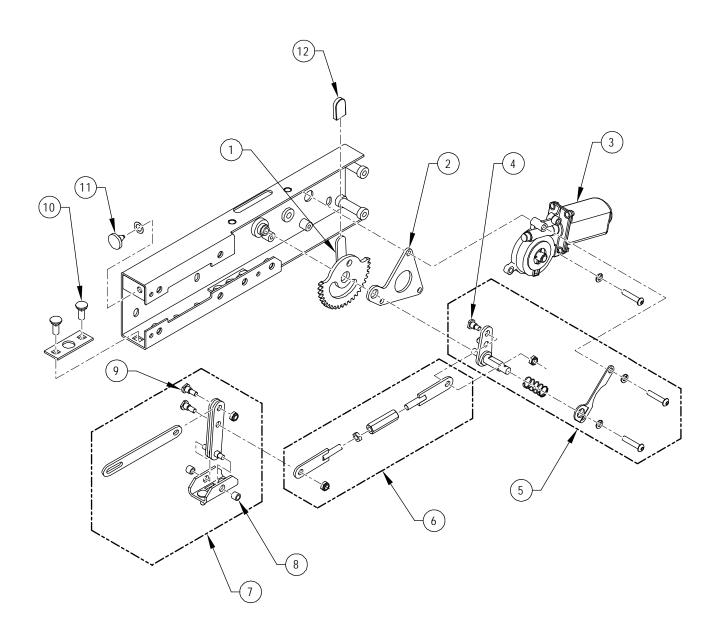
F10X-SERIES CARRIAGE ASSEMBLY (SHEET 2 OF 2)
